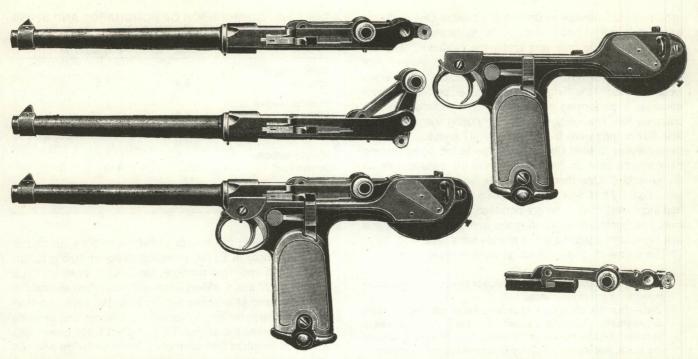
The 1893 Borchardt pistol, assembled and disassembled to illustrate the barrel and bolt assembly and the receiver (frame) assembly. The arrow indicates the camming ramp, which the toggle must strike to unlock the bolt mechanism. (Smith)
